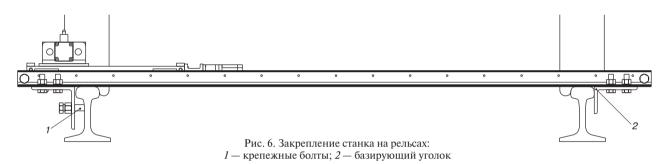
Fastening of the machine to the rails: I — fixing bolts; 2 — base corner
